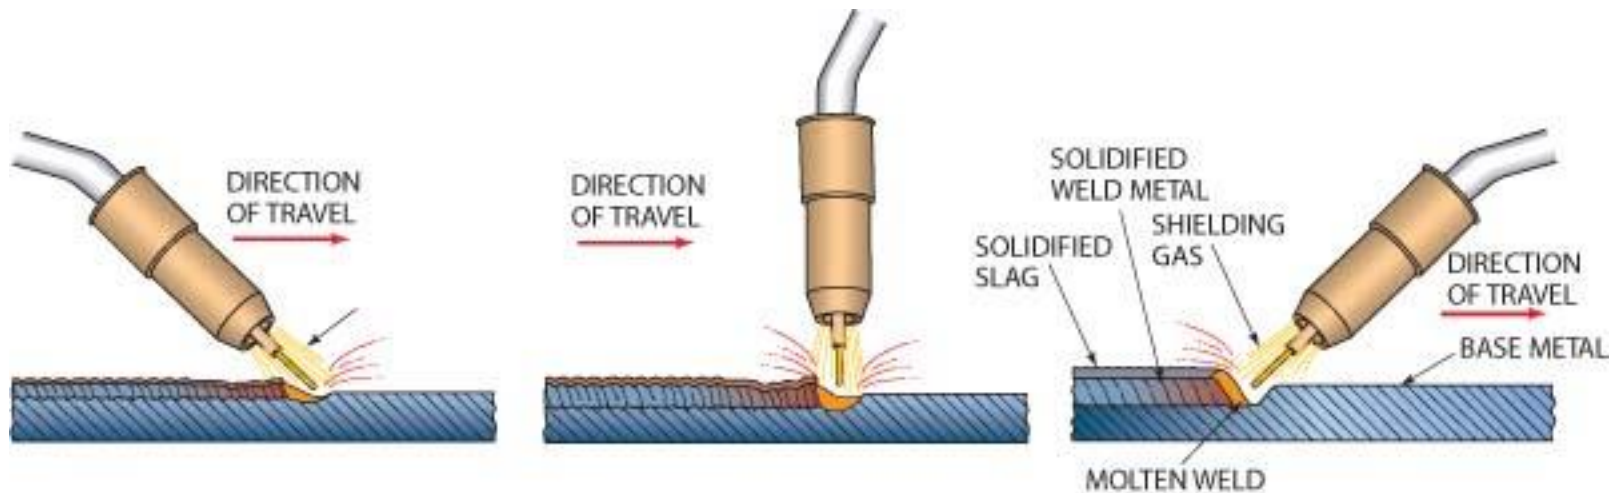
Changing the welding gun angle between forehand, perpendicular, or backhand angles will change the shape of the weld bead produced.
